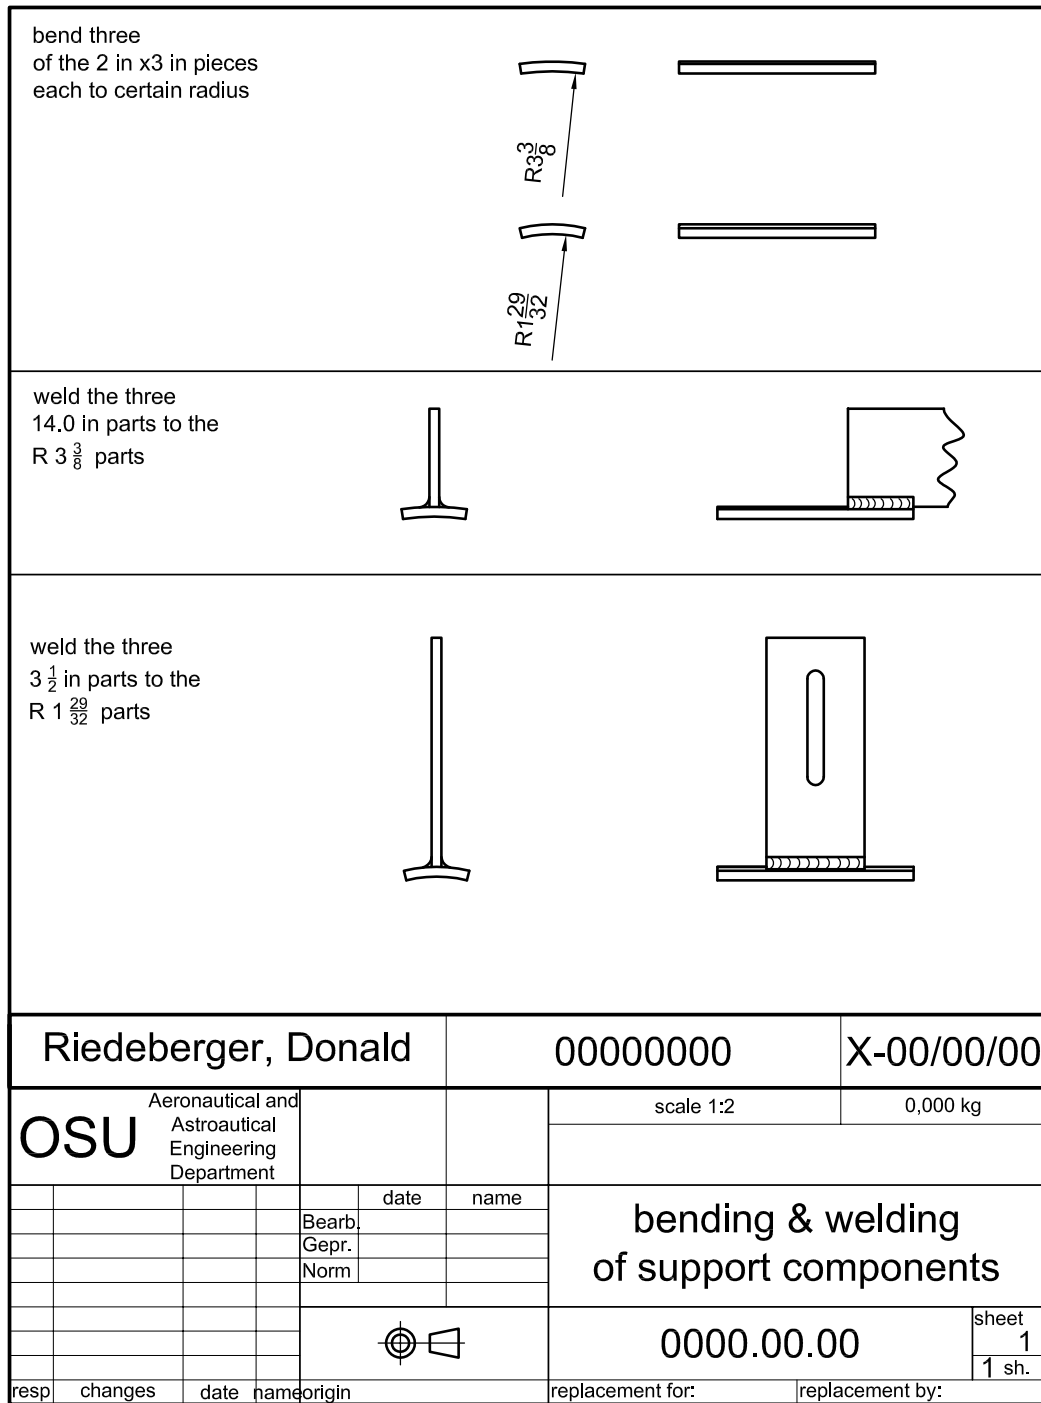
Support mechanism bending and welding instructions - technical drawing not to scale
